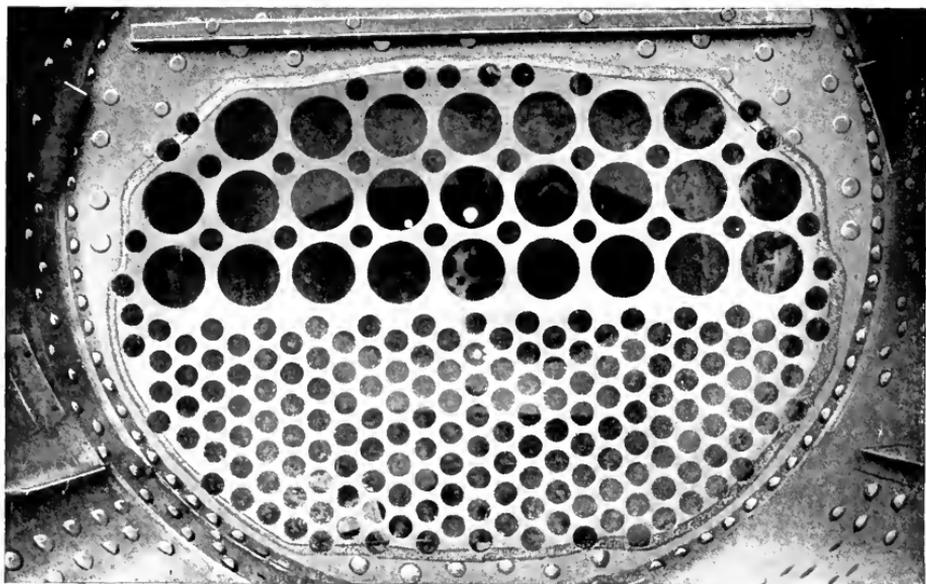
Front Flue Head Welded in by Arc Process
